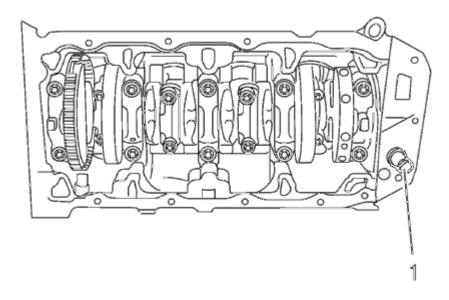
Oil Pressure Relief Valve Closure Bolt Courtesy of GENERAL MOTORS COMPANY
